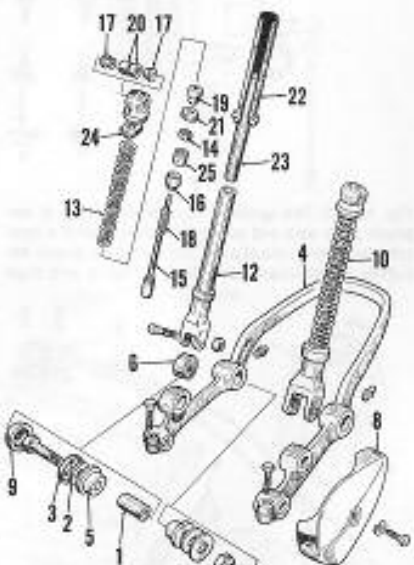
Exploded view of front suspension used on C and CA models.
